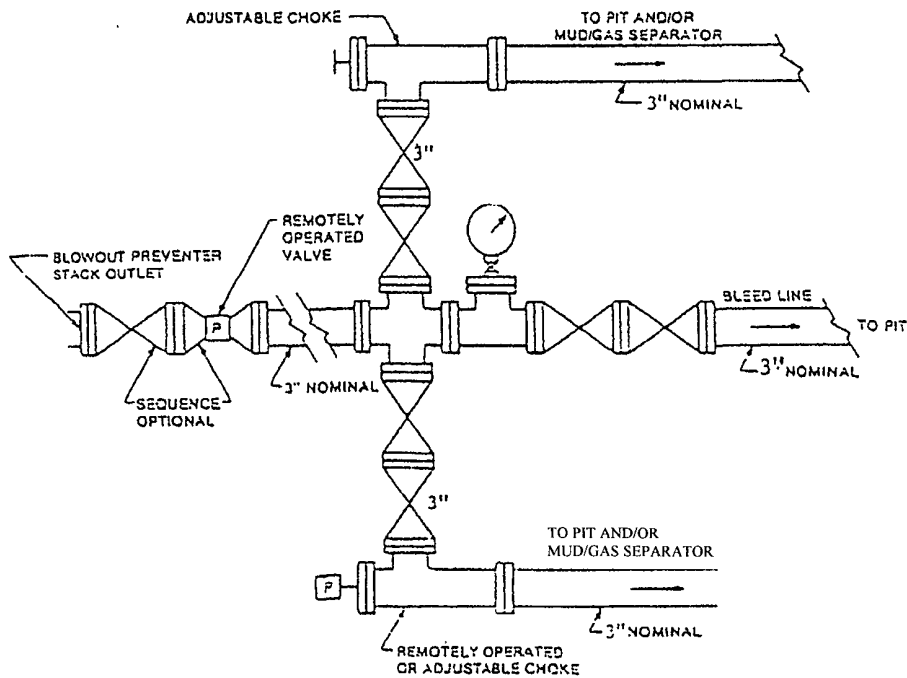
Typical choke manifold assembly for SM rated working pressure service - surface installation
